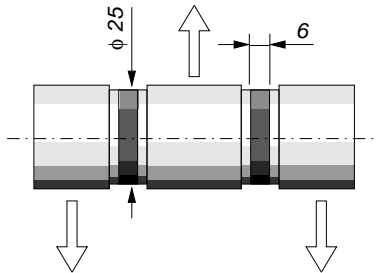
The double shear test specimen used in the evaluation of the material parameters.
